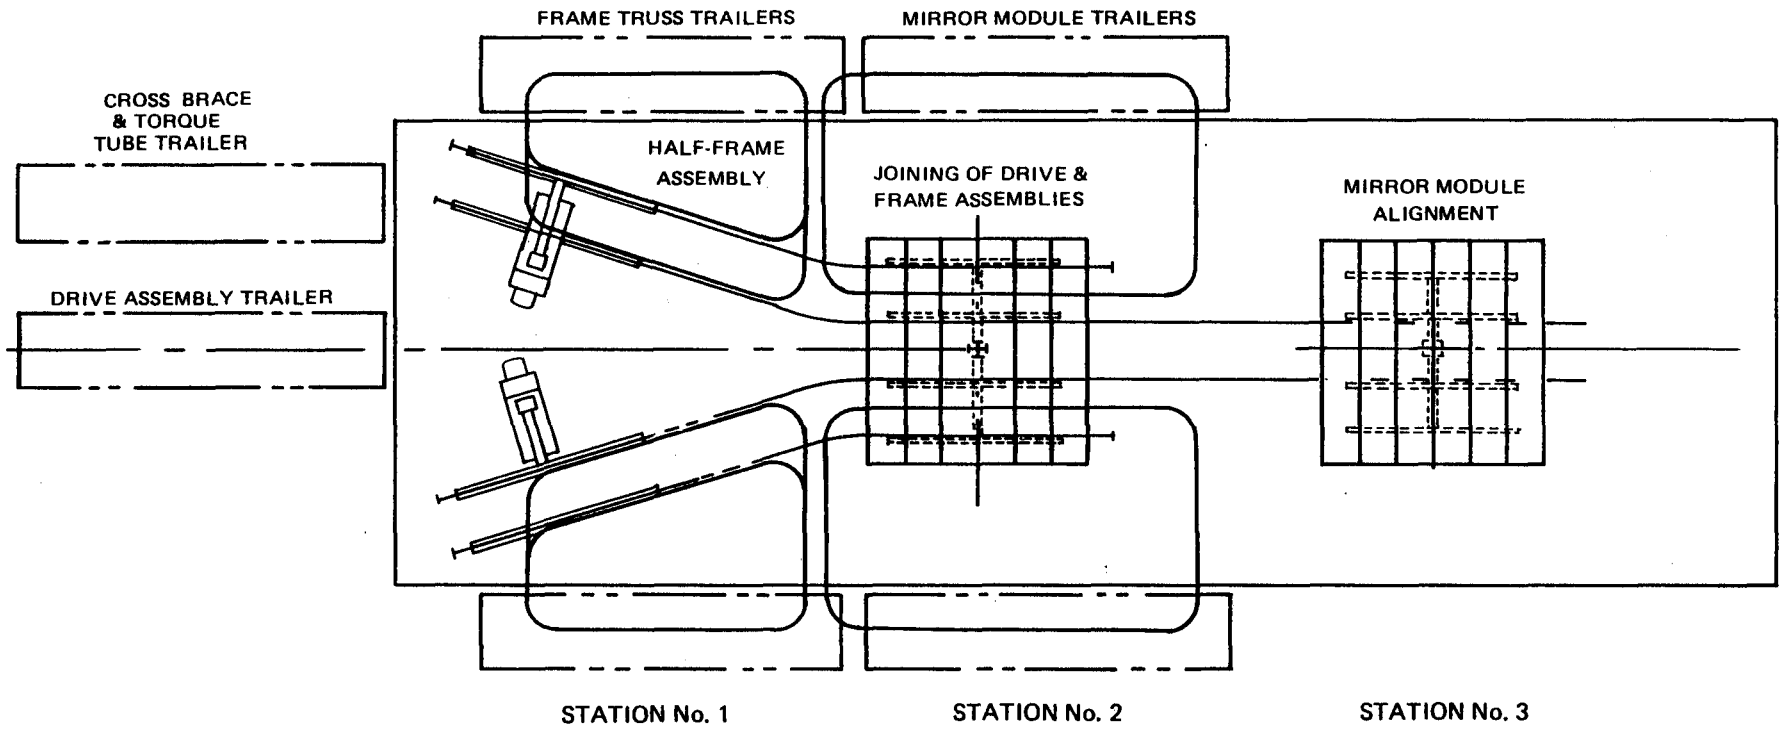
HELIOSTAT ASSEMBLY FACILITY FLOOR PLAN
